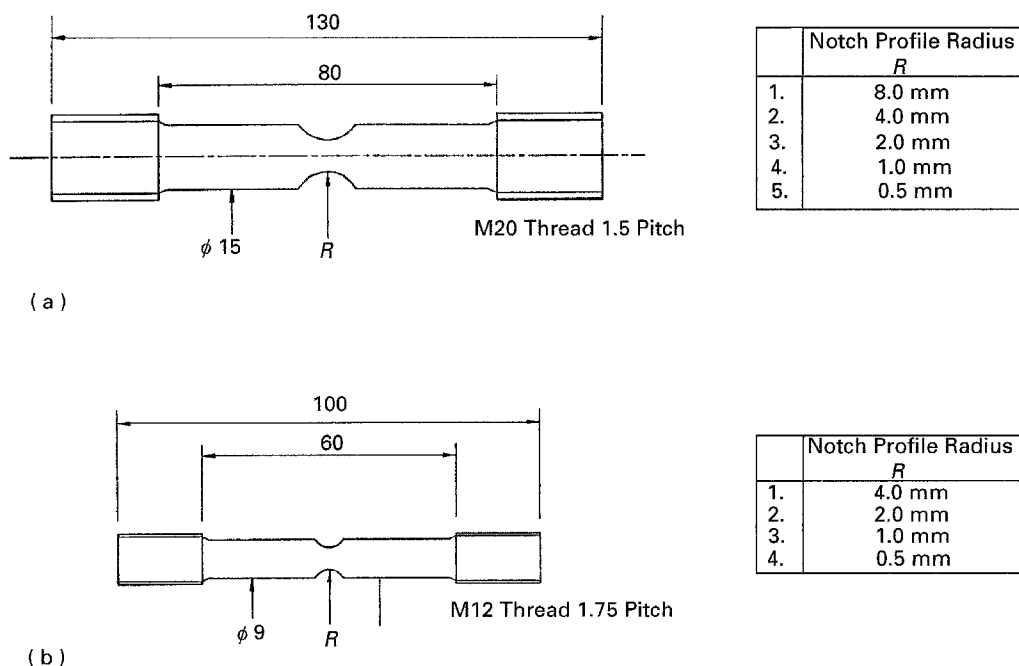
Geometry and dimension of (a) M20 and (b) M12 threaded tensile specimens.
